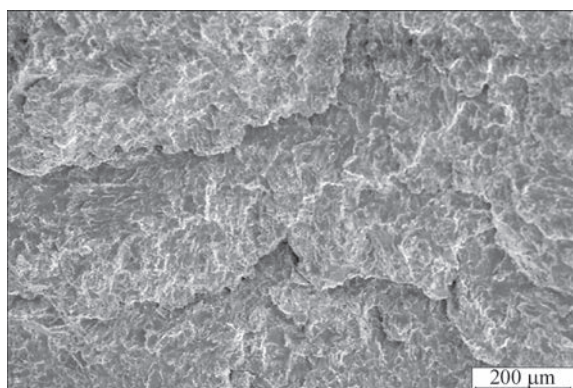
Fractogram of fracture surface of initial metal of titanium intermetallic of TiAl system using LHT
